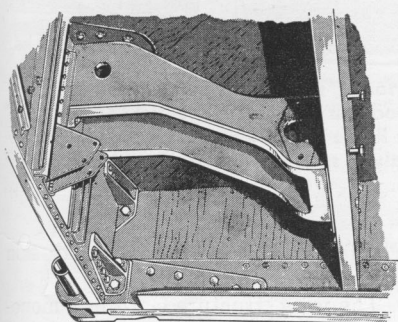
View up into the wing of a de Havilland Hornet, revealing metal structure set in a wooden wing for reinforcement at the location of a hydraulic jack used to fold the outer wing panel up and over the fuselage.
